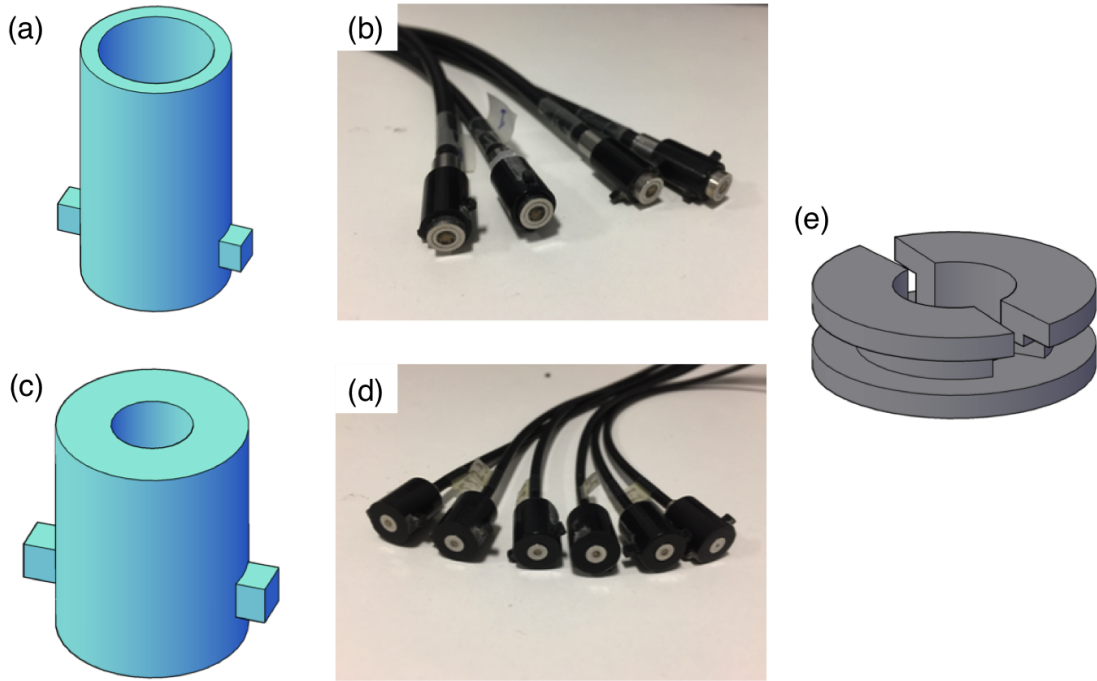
Components required to hold optical fibres in place for visual cortex measurements. (a) conceptual design of 3-D printed holder for the source fibres and (b) source fibres shown plugged into the 3-D printed holder, photo courtesy Dr Phong Phan (c) conceptual design of 3-D printed holder for the detector fibres (d) detector fibres shown plugged into the 3-D printed detector holders, photo courtesy Dr Phong Phan and (e) conceptual design of 3-D printed optode coupler to hold optical fibres on the head
